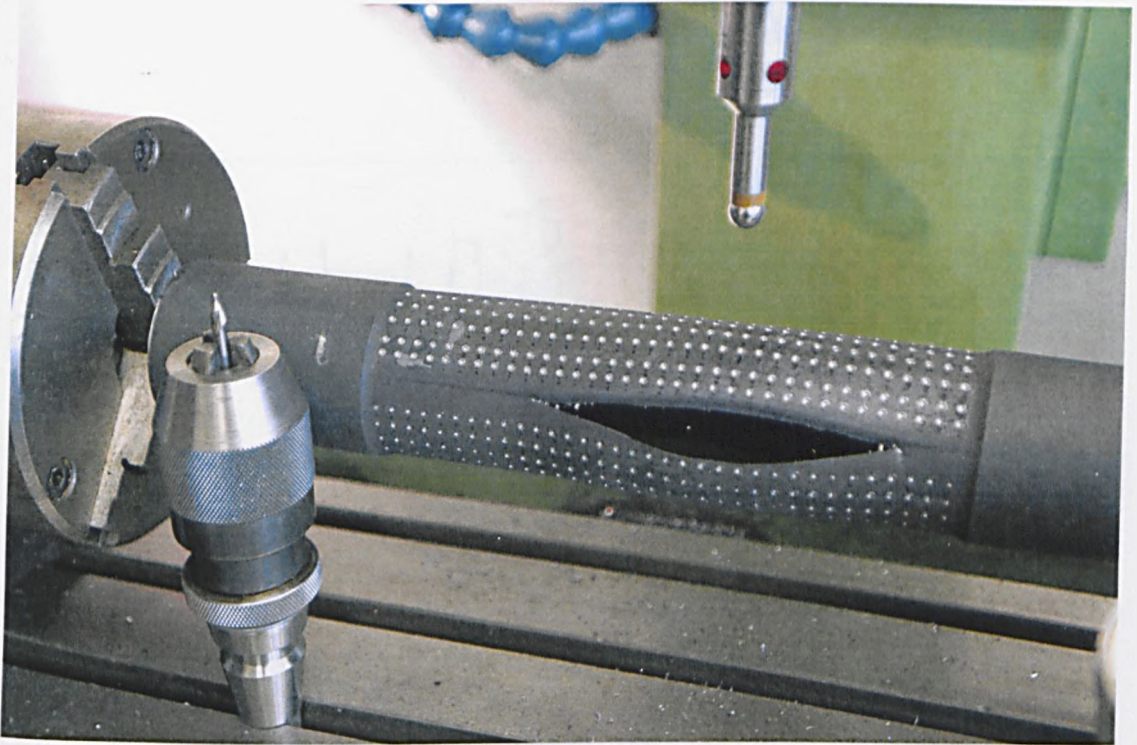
The machine is equipped with a sensor that lights when it touches the surface of the tube.
